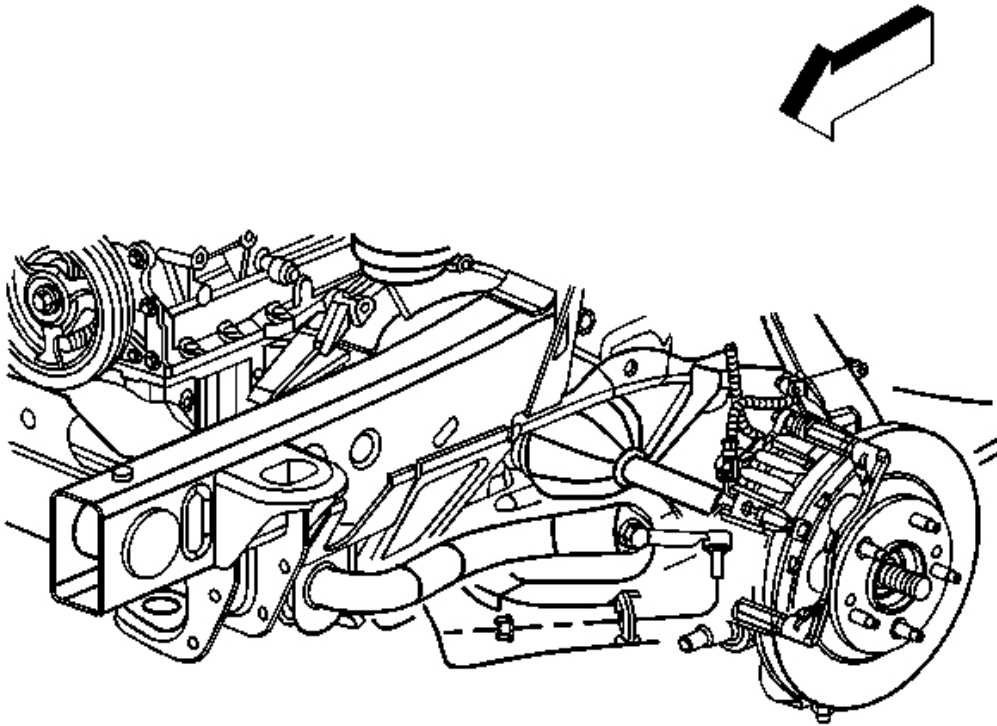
View Of Stabilizer Shaft Link Lower Retaining Nut
